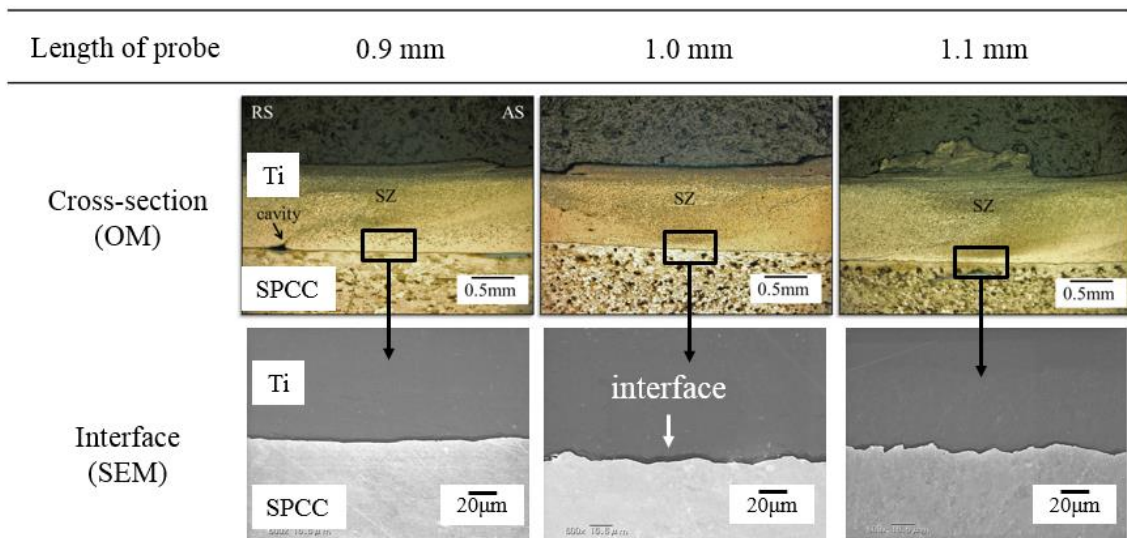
Cross-sections and interfaces of the joints with different probe lengths of 0.9, 1.0 and 1.1 mm at the same welding parameters of 100 mm/min, 350 rpm and load 9.8 kN.
